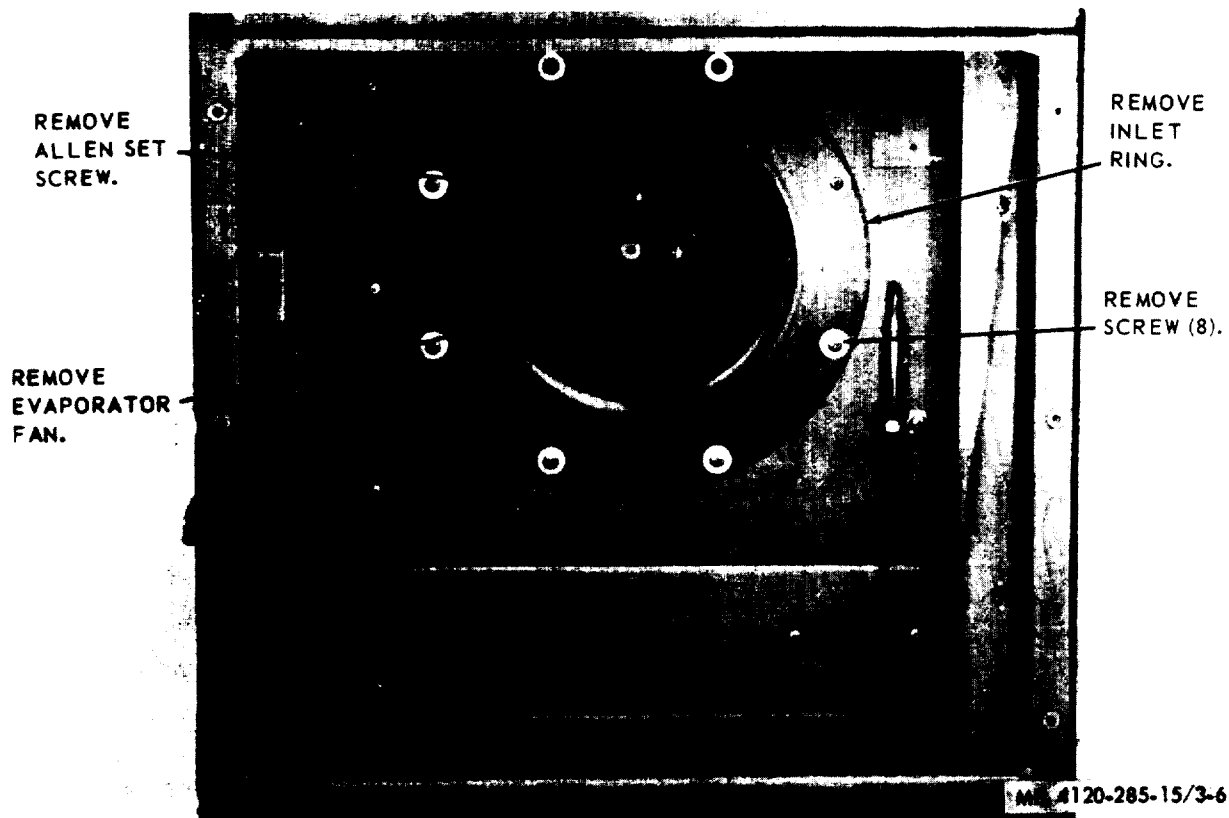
Evaporator fan and inlet ring, removal and installation.
